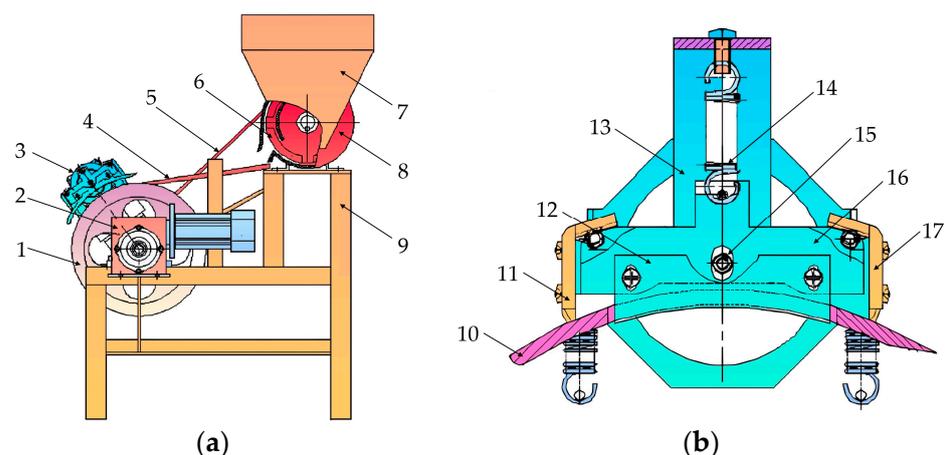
Schematic of lotus seed sheller: (a) overall structure diagram; (b) suspended vibratory dehulling mechanism; (1) driving wheel; (2) speed regulating motor; (3) suspended vibratory dehulling device; (4) chute; (5) V-belt; (6) hopper; (7) discharge wheel; (8) discharge wheel cover; (9) frame; (10) pressing plate; (11) left guide rail; (12) blade; (13) spring fixing plate; (14) spring; (15) eccentric pin; (16) blade holder; (17) right guide rail.
